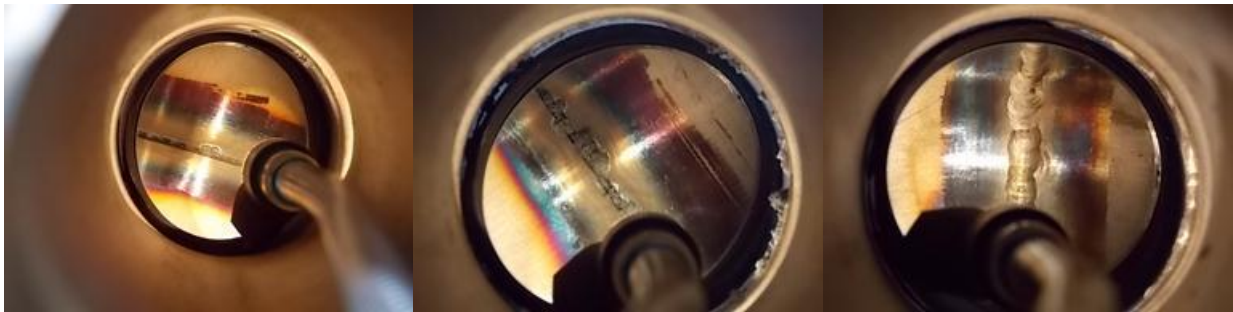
Examples of welds produced using 316L weld filler rods
